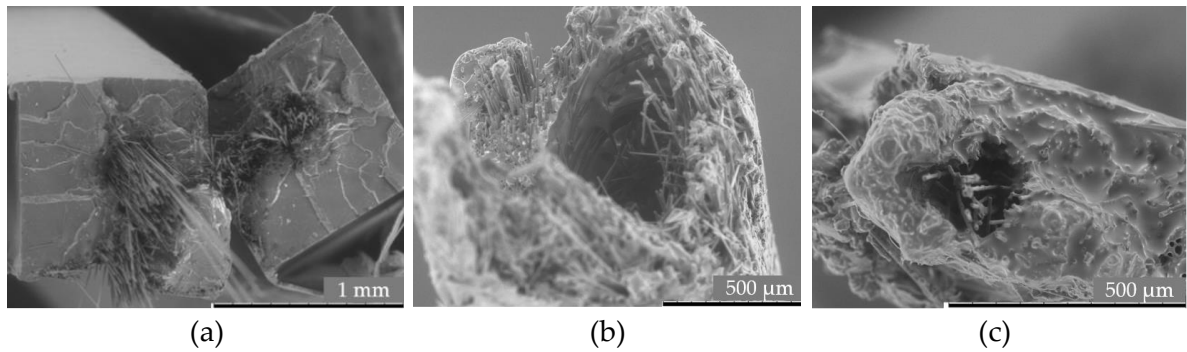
SEM images of (a) a moulded filament with a bundle of fibre in the middle that was pulled out under tensile load; (b) a circular filament with a large hole in the middle that leads to failure; (c) a printing part with Raster-3 condition fails at the filament bonding position leaving with clean failure surface without fibre pull-out holes or fibre failure on the surface.
